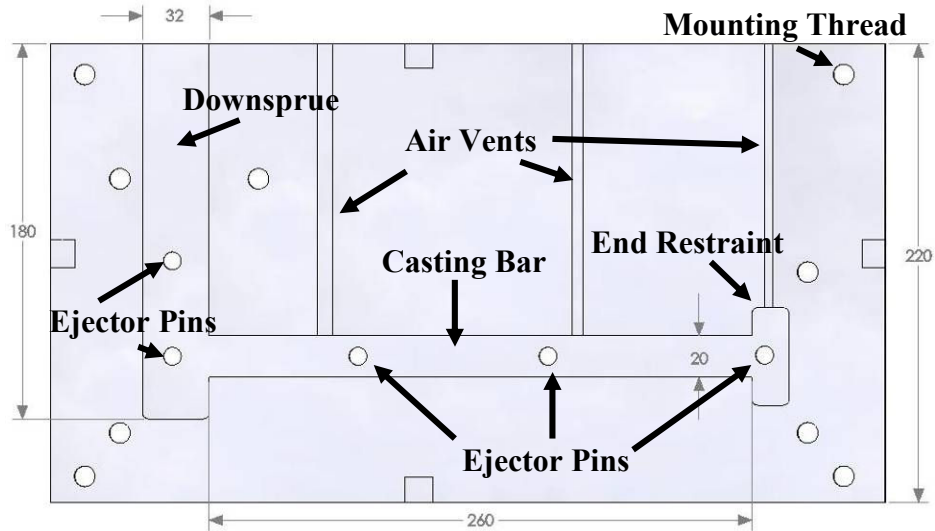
H13 Permanent Mould CAD Design (Dimensions in mm)
